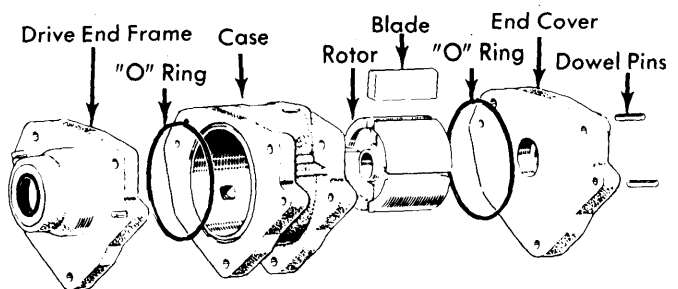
Exploded View of Vacuum Pump for Land Cruiser
